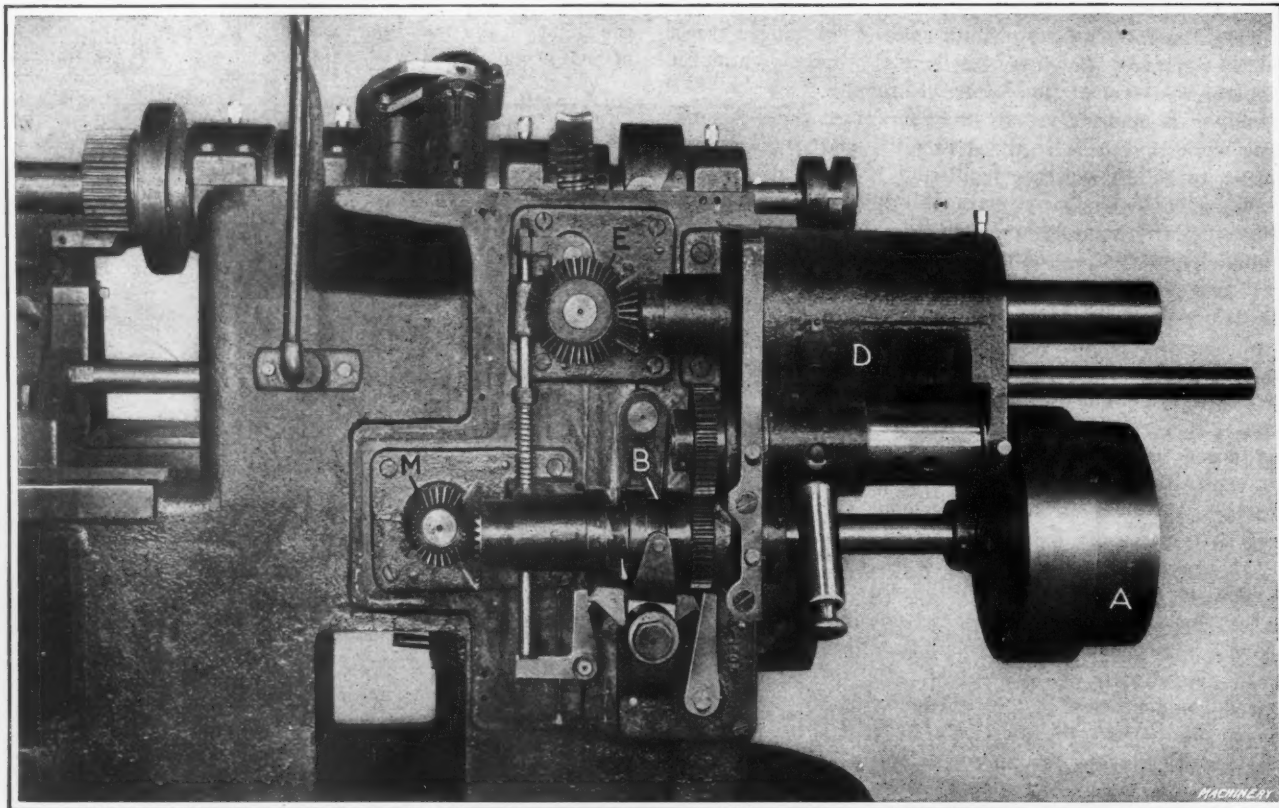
Close-up View of Driving Mechanism on Automatic Relieving Machine
